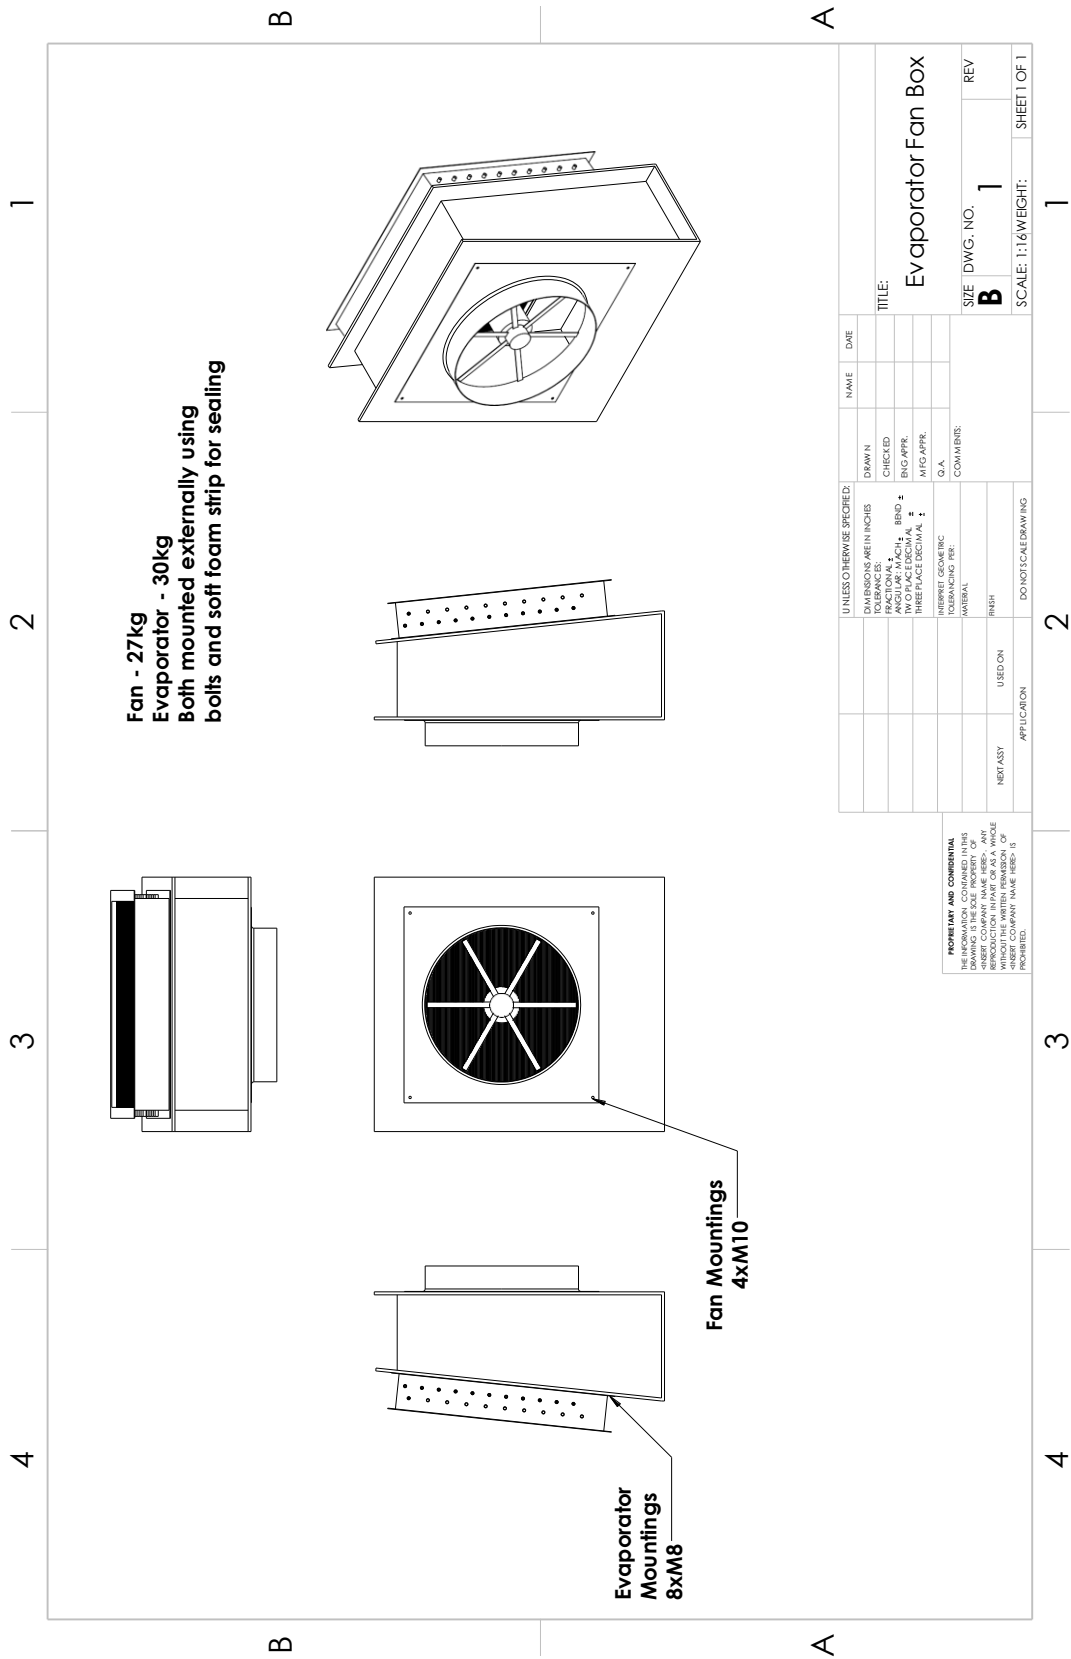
Technical drawing of the evaporator-fan assembly.
